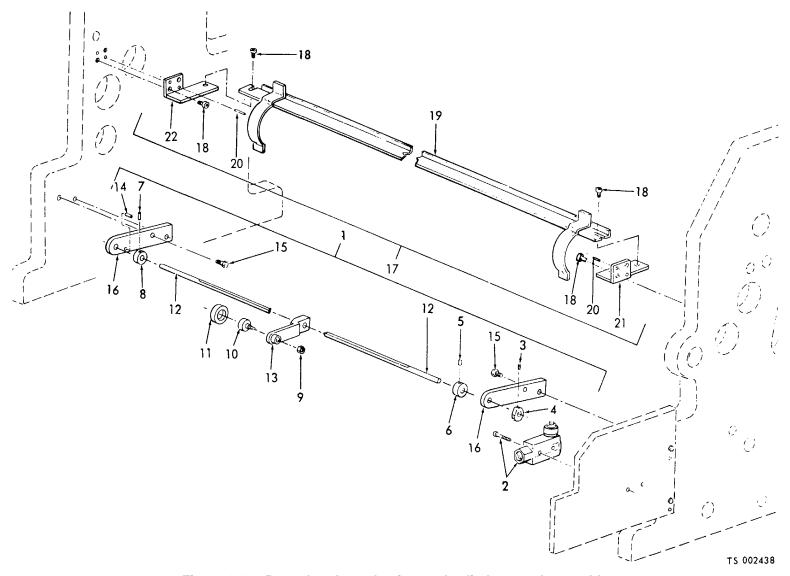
Paper break mechanism and cylinder guard assembly.
